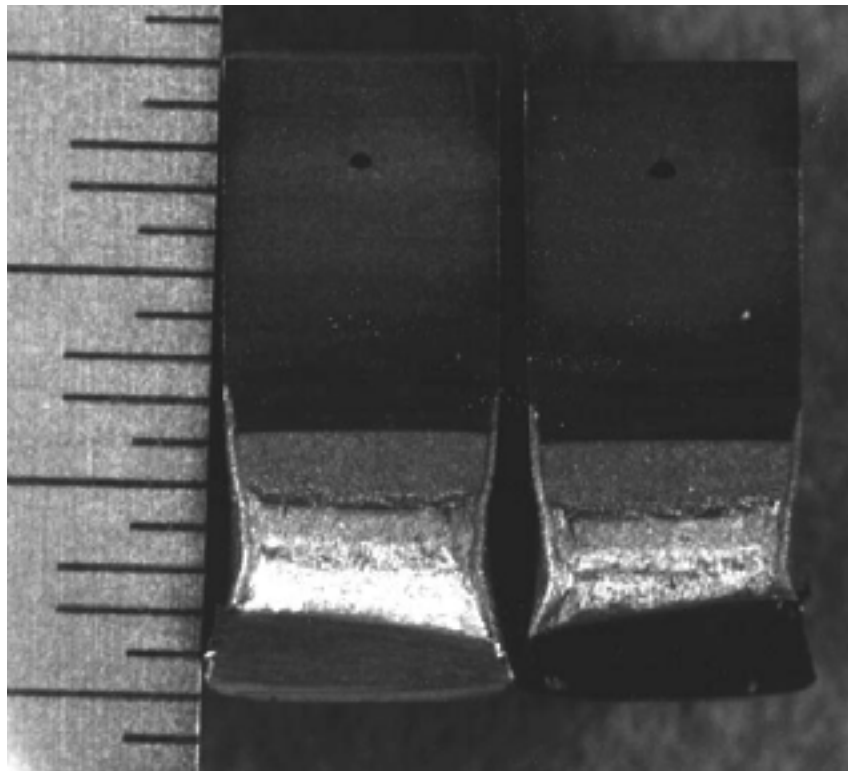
Fracture surface of specimen C16-D tested at 288°C
